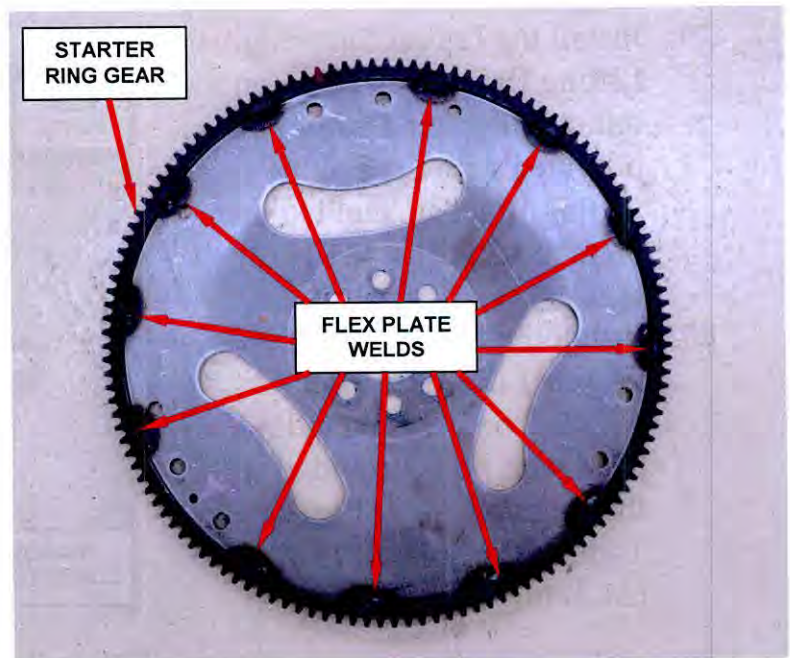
Flex Plate Welds may not Clear Torque Converter Lugs
